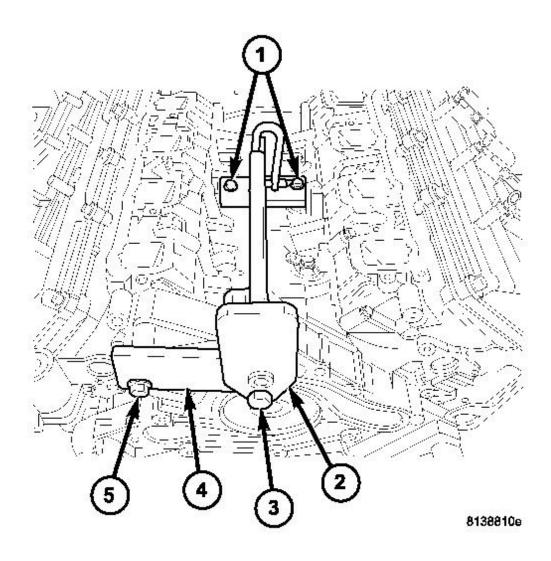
Engine Lift Fixture And Adapter Courtesy of CHRYSLER LLC
